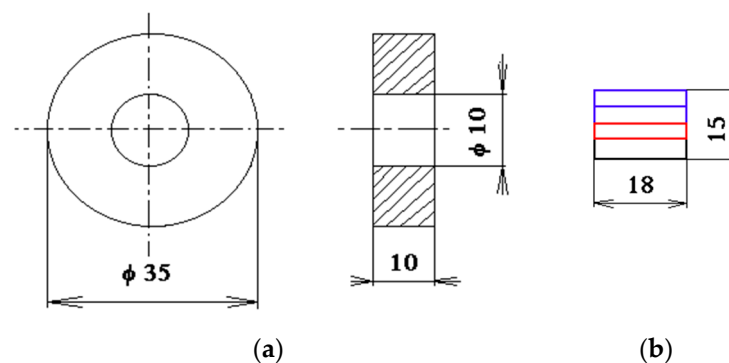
Schematic of the test specimens evaluated in the Amsler machine. (a) Rail material specimen; (b) cladded specimen.
